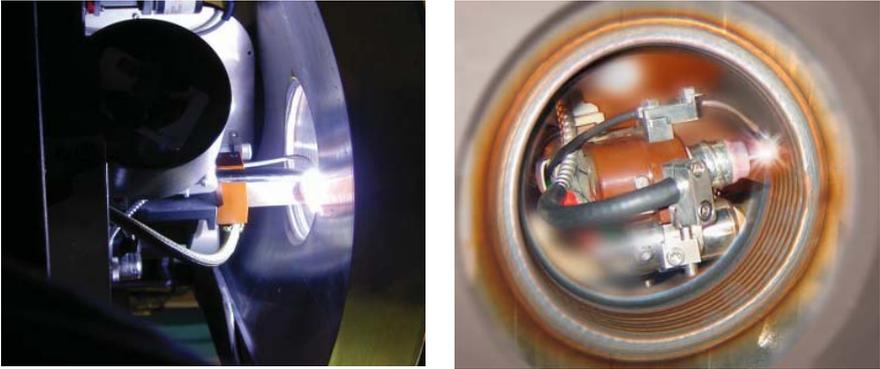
Branch repair by internal cladding with 316L on a nuclear power plant primary circuit. The welding head is positioned inside the piping. An endoscope is used for remote monitoring by the operator. Welding is continuous (no stoppage on each revolution) due to the use of an orbital head with a collector.
